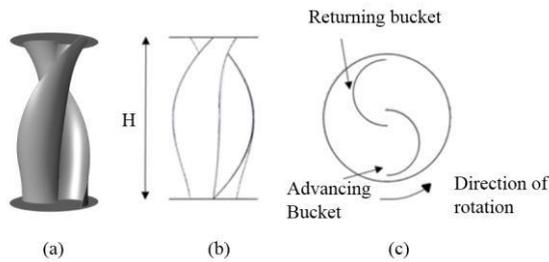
(a) CAD model of Helical Savonius rotor using Solidworks, (b) Side view, H = height of the rotor, (c) Top view – the circle represents the end plate.
